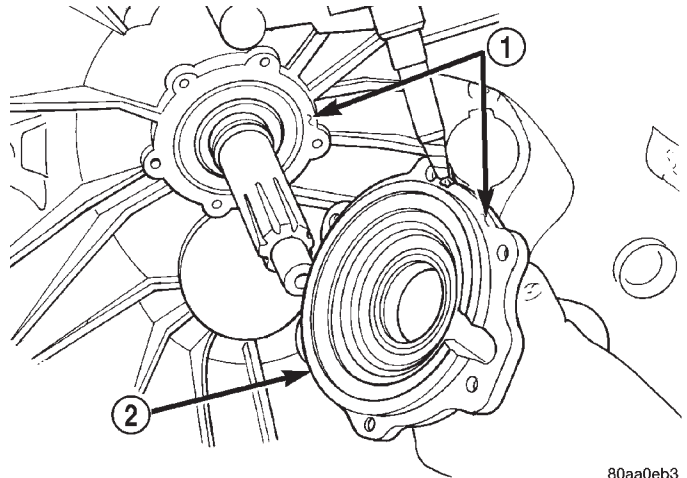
SEAL BEARING RETAINER AND HOUSING
